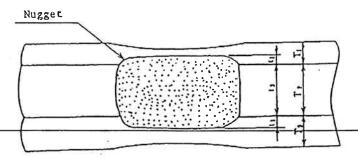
Penetration Ratio of a Weld among Three or More Pieces
